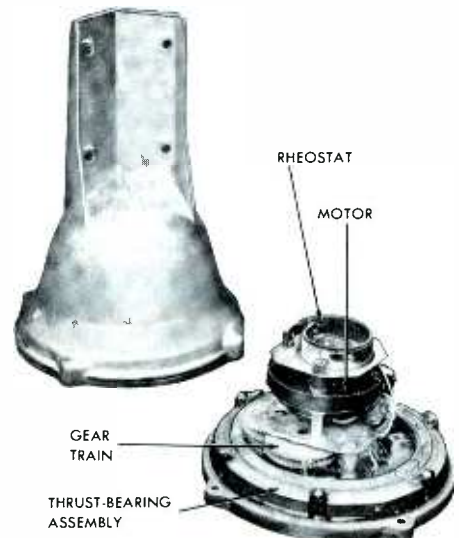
Mechanism in CDR Heavy-Duty Rotators.
